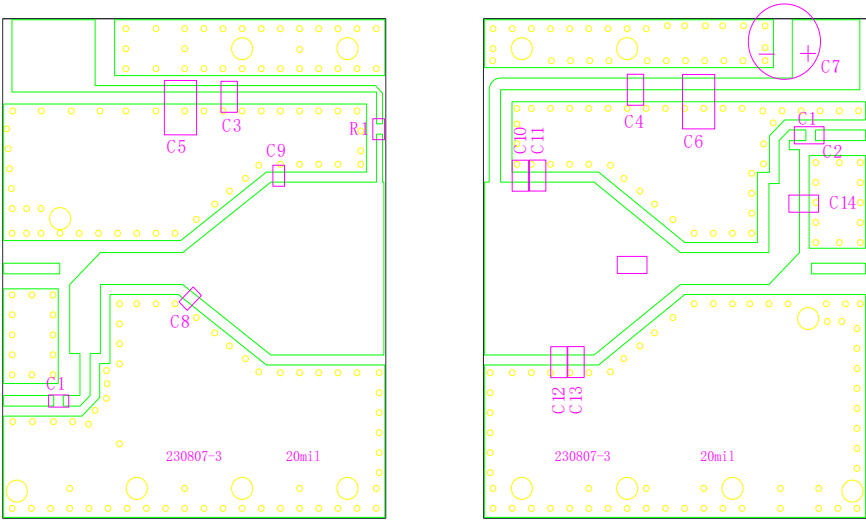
Test Circuit Component Layout (1200-1400MHz)
